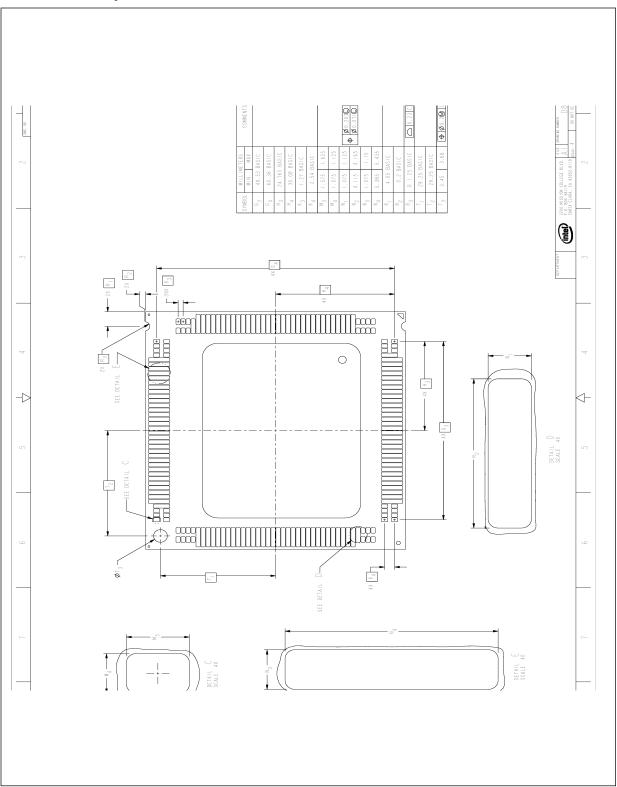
Intel[®] Itanium[®] Processor 9300 Series Processor Package Drawing (Sheet 2 of 4)
